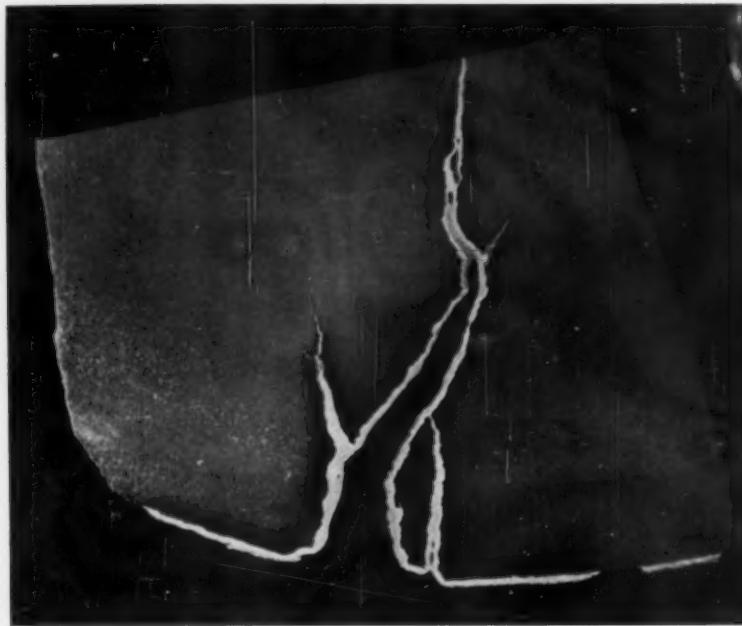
Crack on Tension Side of a Steel U-Bend Specimen Caused by Zinc Penetration. Initiated at the throat of a notch in a weld overlay deposit, the crack appeared after the specimen was bent and immersed in zinc at 890° F. It follows an intergranular path. Test demonstrates possible mechanism of weld root failure in galvanized steel weldments. 6 X, 2% nital
